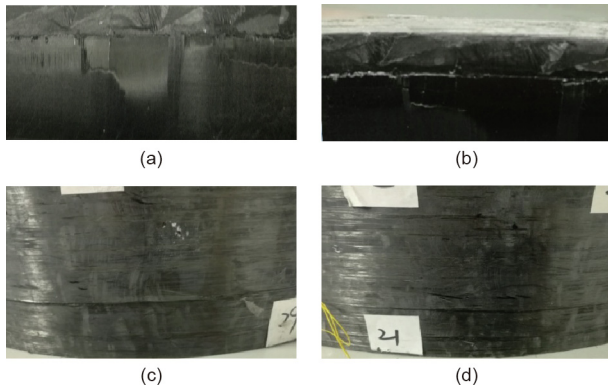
Failure mode of the CFRC AFSC. (a,b) Facesheet crushing at upper edge; (c,d) facesheet crushing at lower edge.
